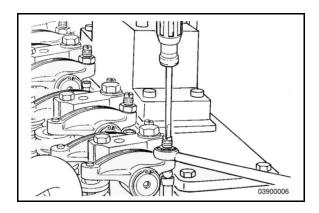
LOOSEN THE ADJUSTING SCREW LOCKNUTS AND SCREWS
